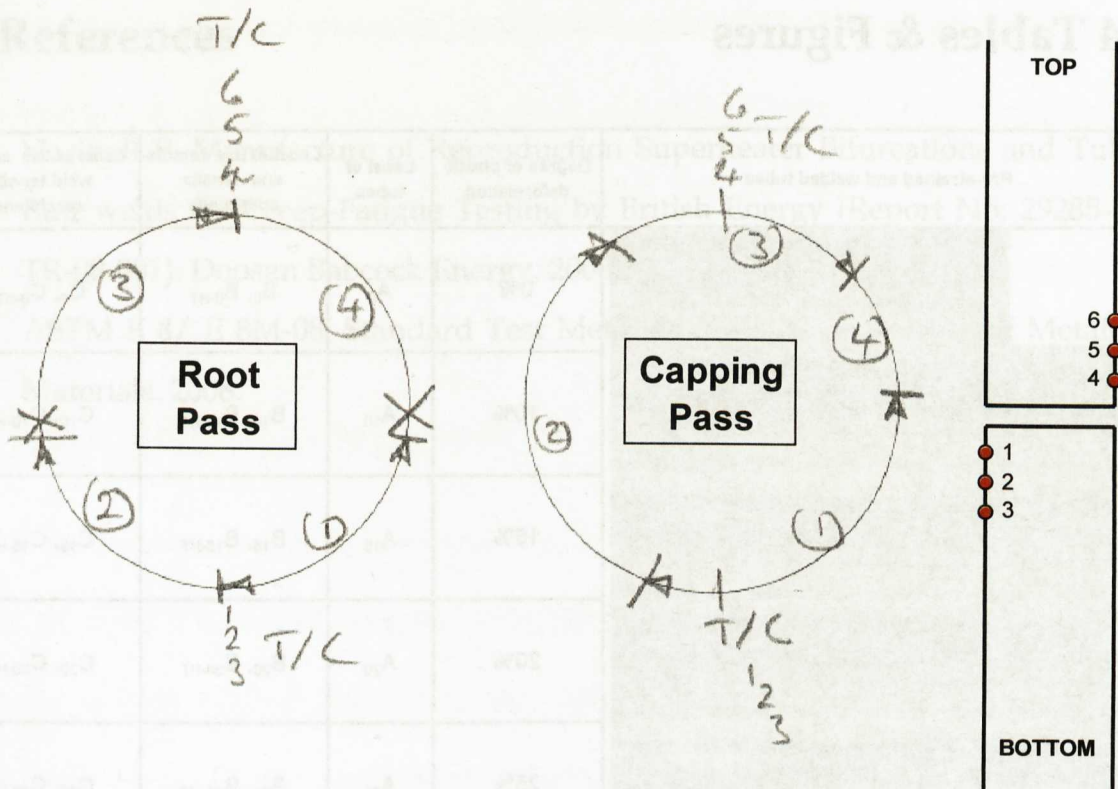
The schematic view of the welding procedure of the plain tube A₀. (x) shows the position of the root tacks and arrows are for the section of each pass. The positions of the thermocouples (1-6) are also shown on the vertical drawing of tube.
